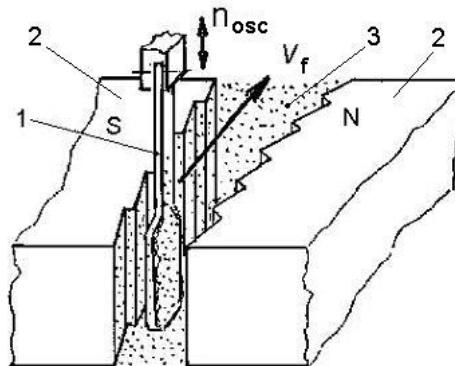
Removal of burrs located along the profile of workpiece made from sheet material.
